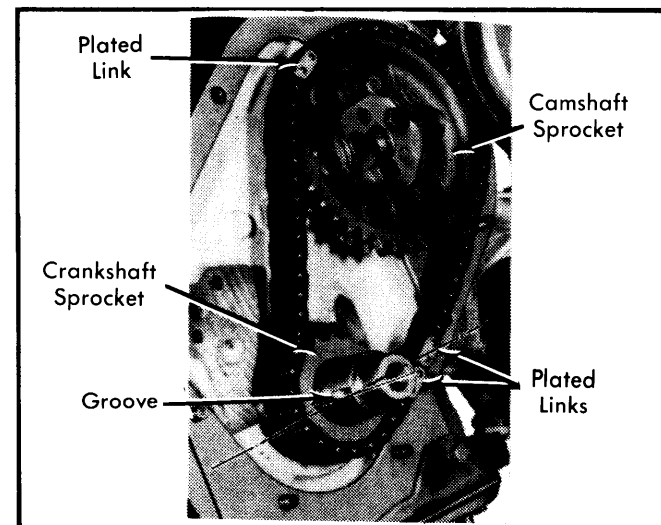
Proper Alignment of Camshaft and Crankshaft for Removing Timing Chain
